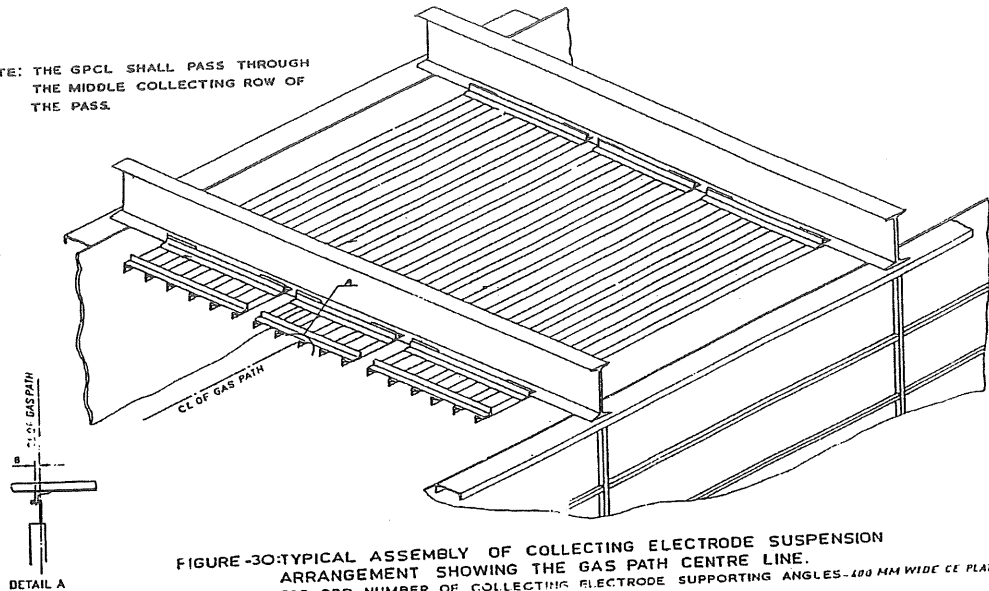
TYPICAL ASSEMBLY OF COLLECTING ELECTRODE SUSPENSION ARRANGEMENT SHOWING THE GAS PATH CENTRE LINE. FOR ODD NUMBER OF COLLECTING ELECTRODE SUPPORTING ANGLES - 100 MM WIDE CE PLATE
